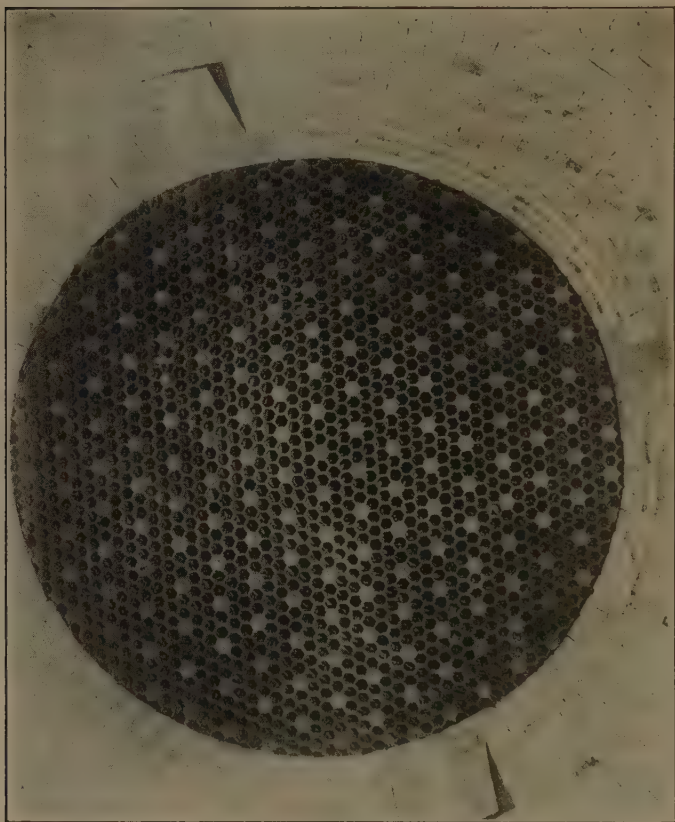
BOTTOM OF MERCURY BOILER SET IN FURNACE,
